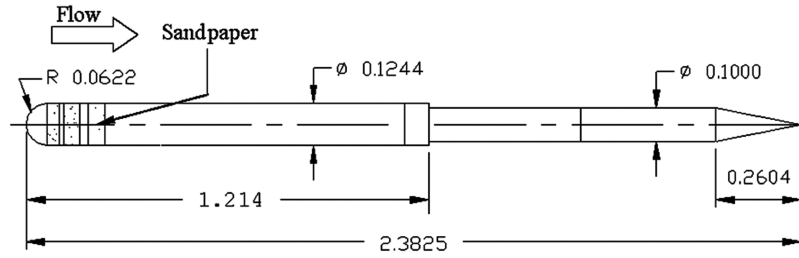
Schematic drawing of the test model (dimensions in meters).
